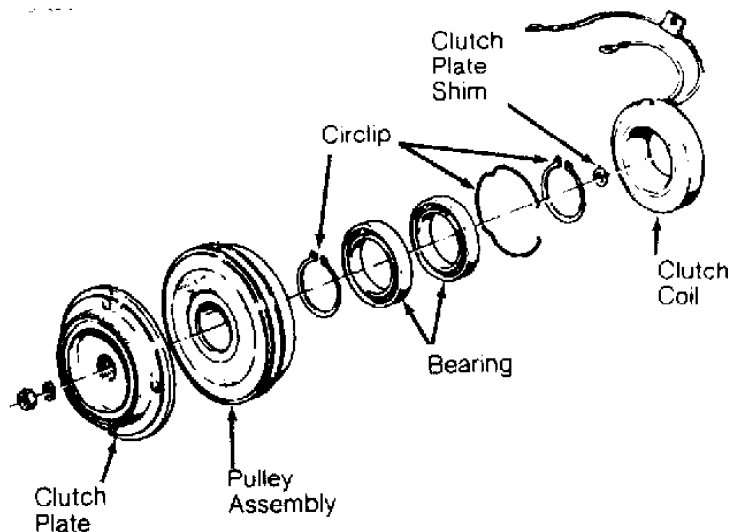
Exploded View Of Compressor Clutch (Bosch 6-Cylinder)
